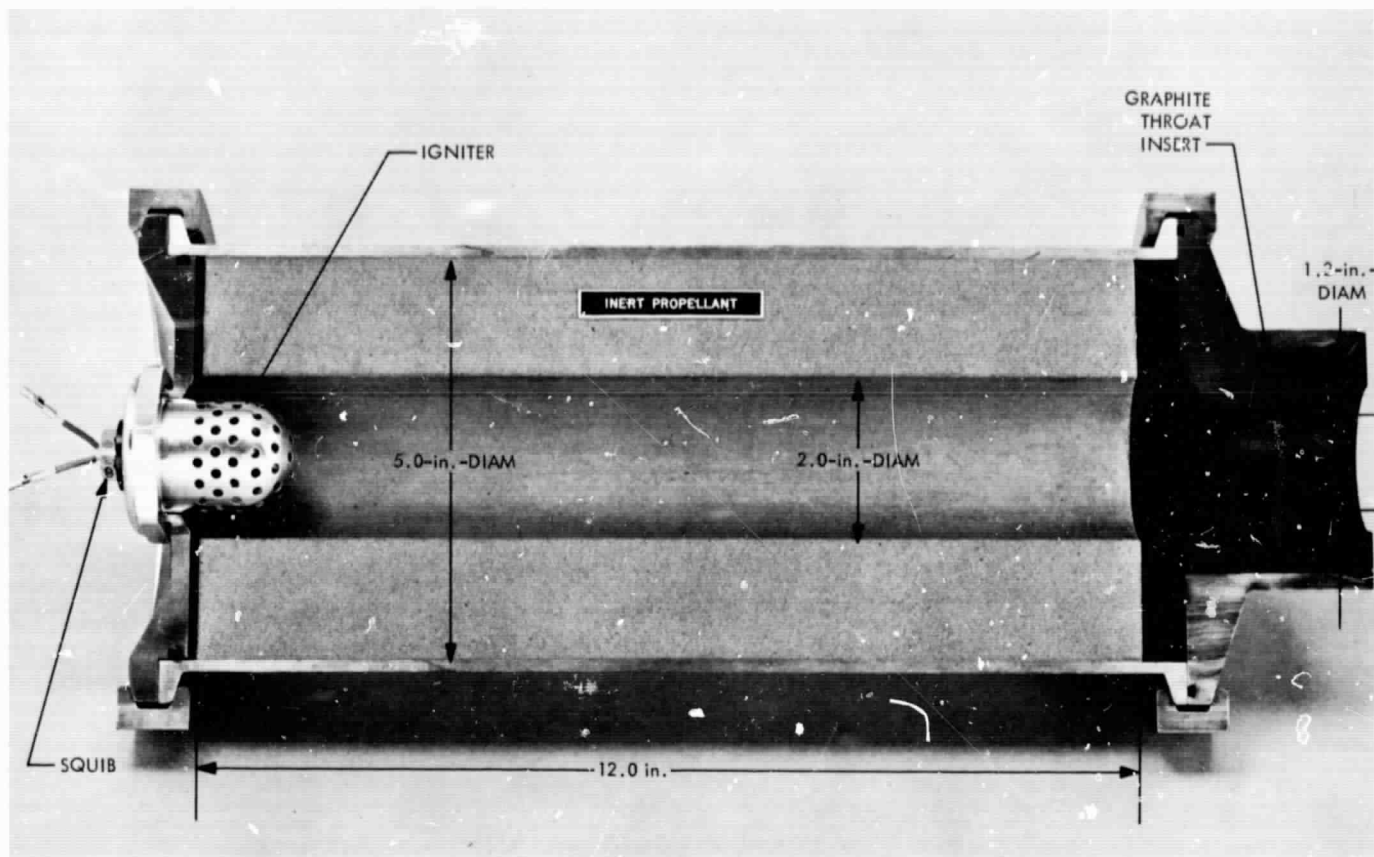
Sectional photograph of the 5 × 13 batch-check motor
